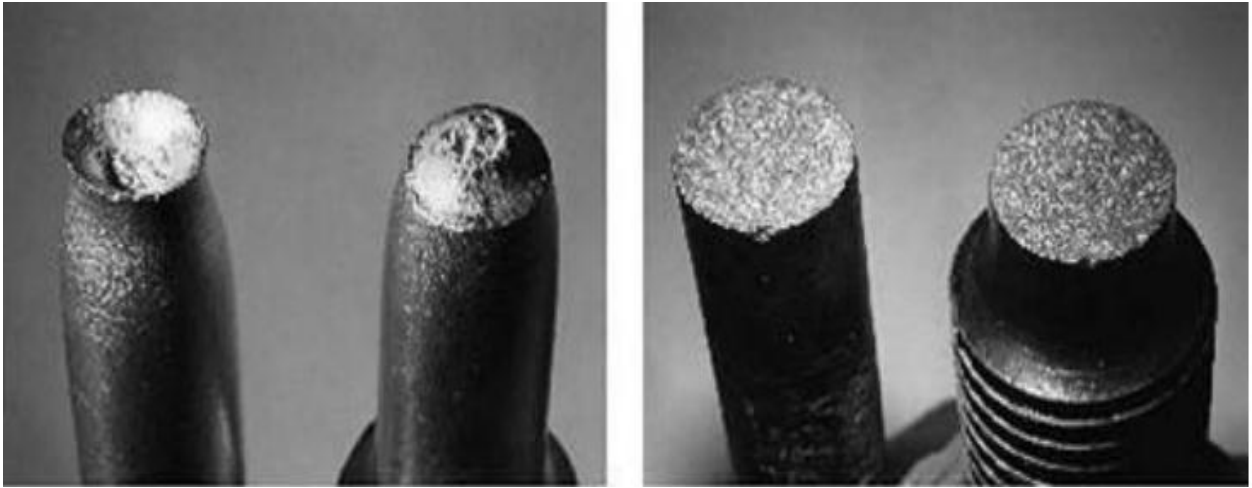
(a) cup-and-cone type fracture in ductile material (b) flat cleavage fracture in brittle material
